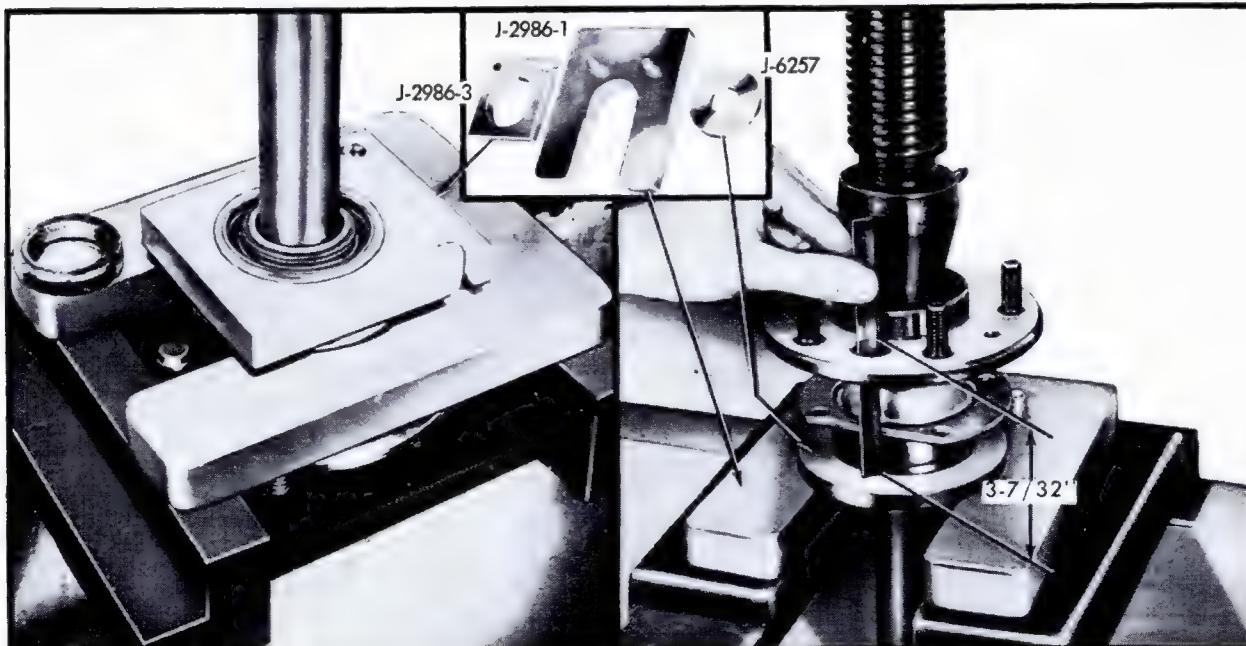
Removing and Installing Rear Wheel Bearing
